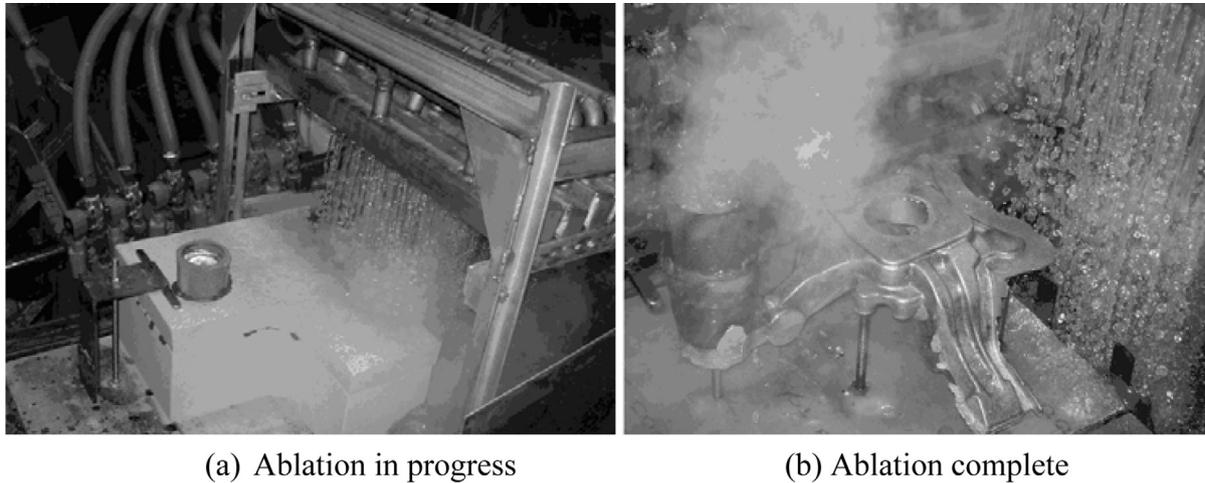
Ablation casting process for aluminum and magnesium casting [26].
